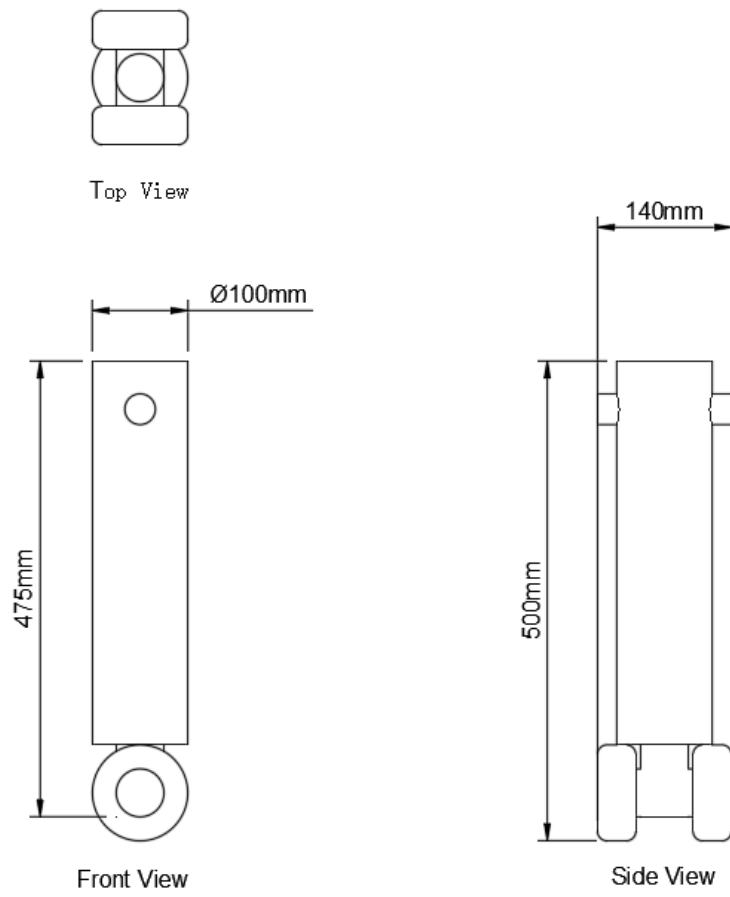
Landing Gear Fully Retracted Three-Dimensional View
